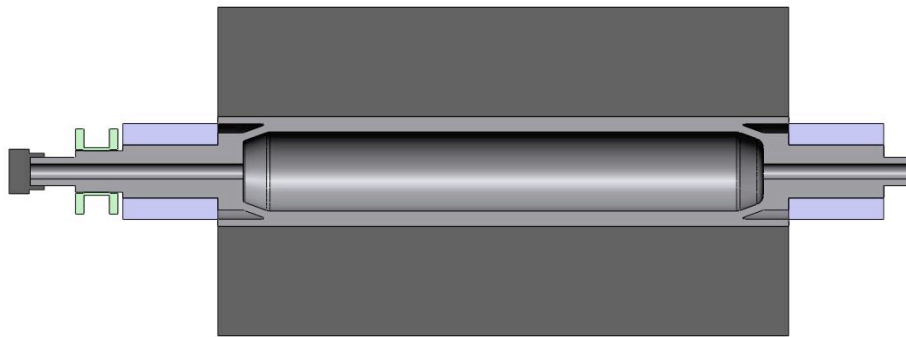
Section of 210 MJ flywheel rotor model showing reduced thrust bearing
